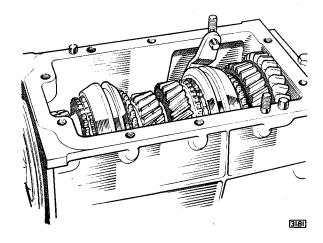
Re-assembled gearbox prior to refitting the top cover.
